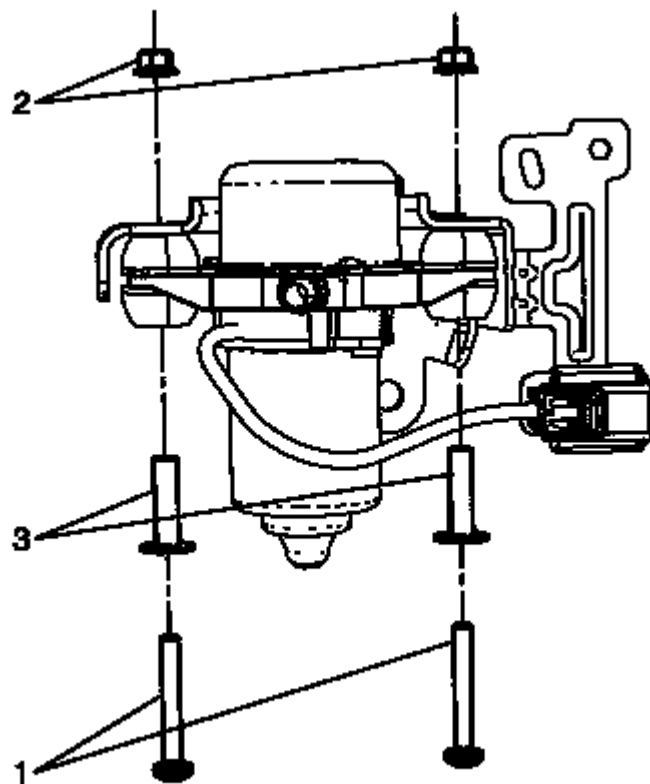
Power Brake Booster Pump To Bracket Bolts And Nuts
